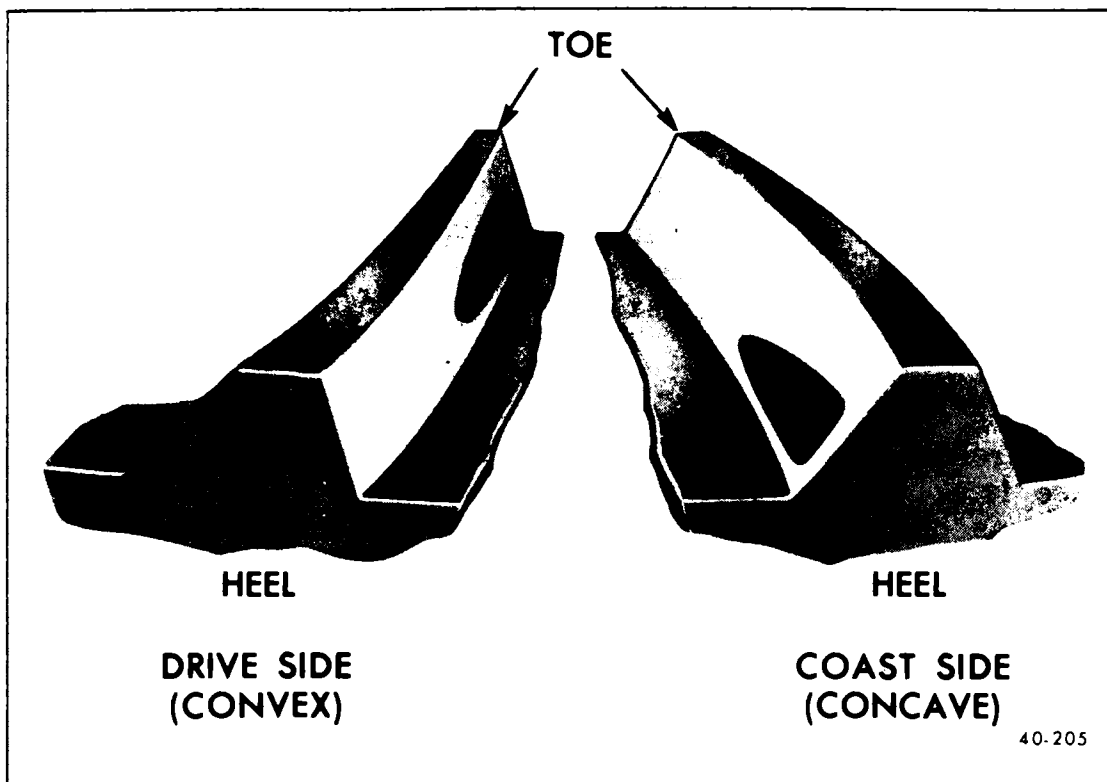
Tooth Pattern - Pinion too Close to Ring Gear
